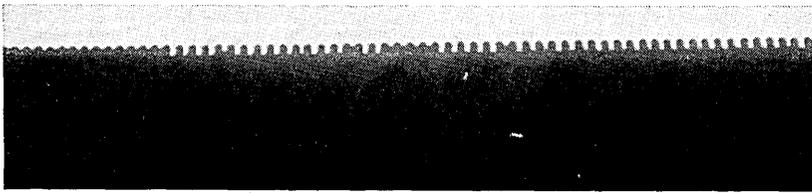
A shadowgraph of a coil winding showing irregularities in the wire spacing due to non-uniformity in pitch control of winding machine.
